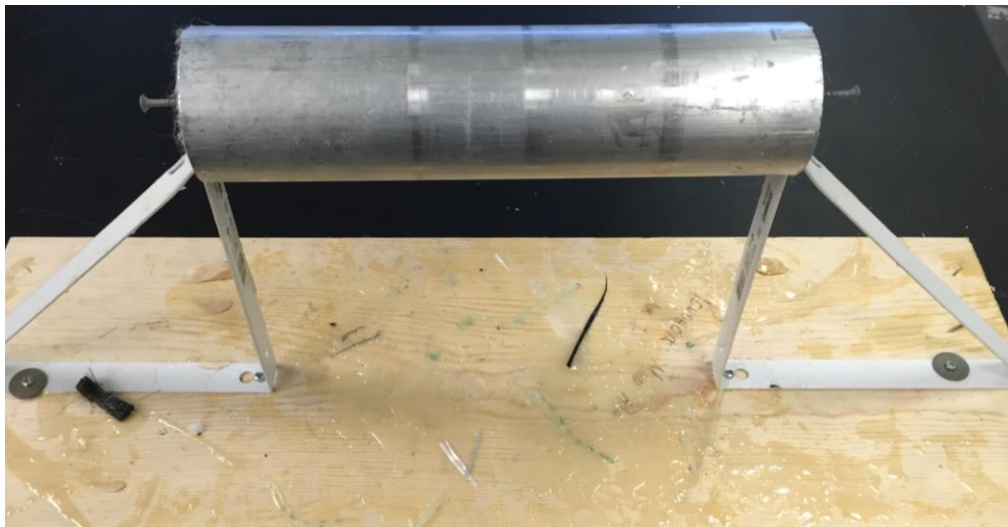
Cylinder Mold Prior to Preparation for Composite Layup.
